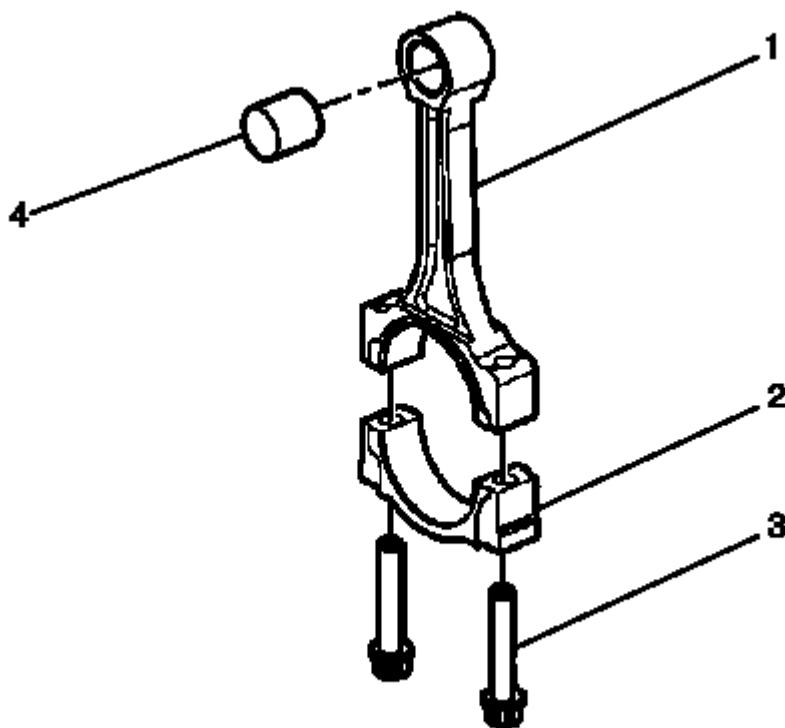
Identifying Piston Pin Bushing, Connecting Rod Beam, Rod Cap & Bolts
